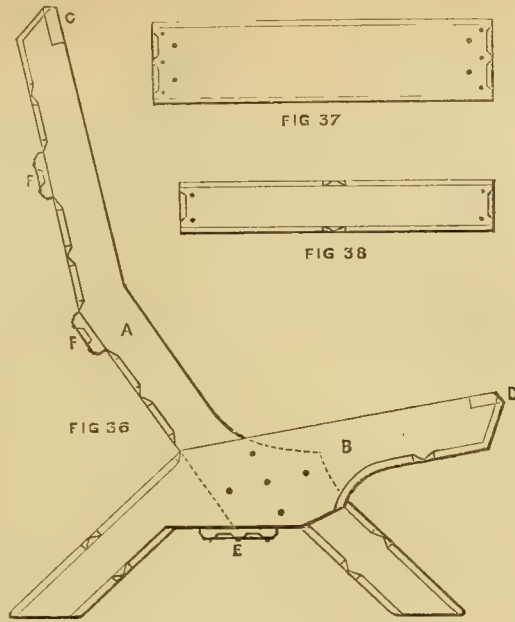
LOUNGING CHAIR—SIDE ELEVATION. FIG. 37.—BOTTOM BOARD. FIG. 38.—BACK SPAR. SCALE, 1 INCH TO 1 FOOT.
